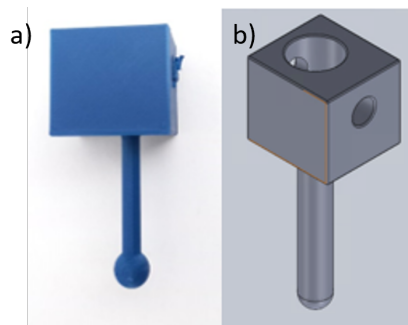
Superior part of BB test machine prototypes: a) first printed prototype; b) second *SolidWorks* model prototype.
